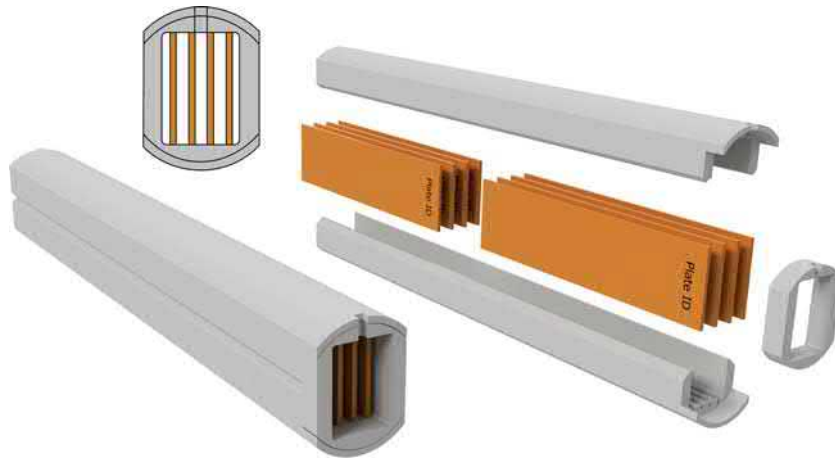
Miniplate test capsule assembly containing eight plates per capsule.
